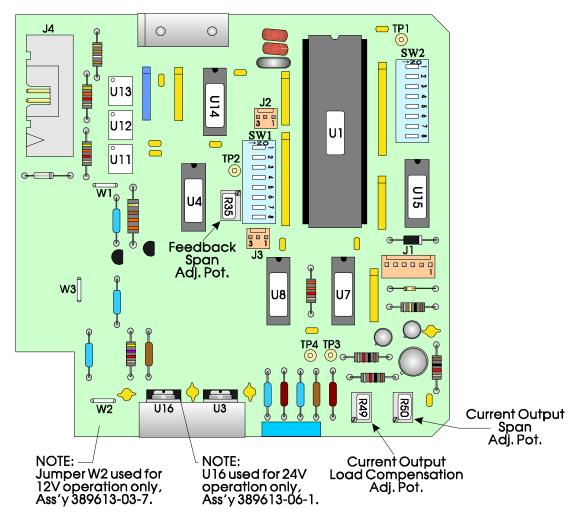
Assembly, Raise/Lower Type CPU Board with Current Output
